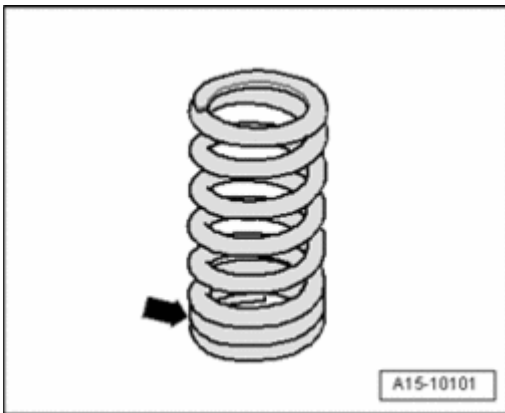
Identifying Tight Spring Coils Face Toward Cylinder Head
